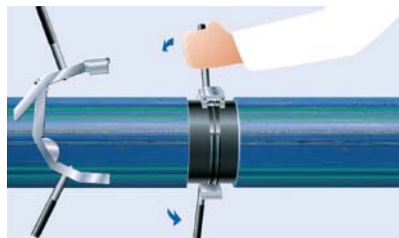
Removal of the weld bead with an external bead remover
